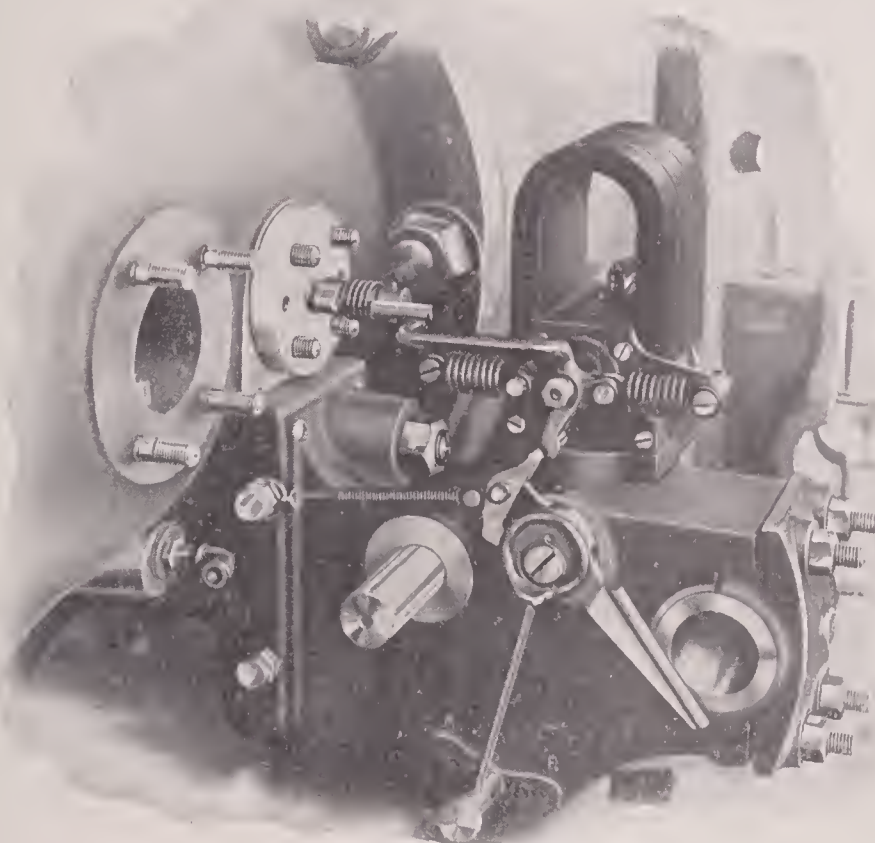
Ignition Gear, Olds Type "K" Engine.
